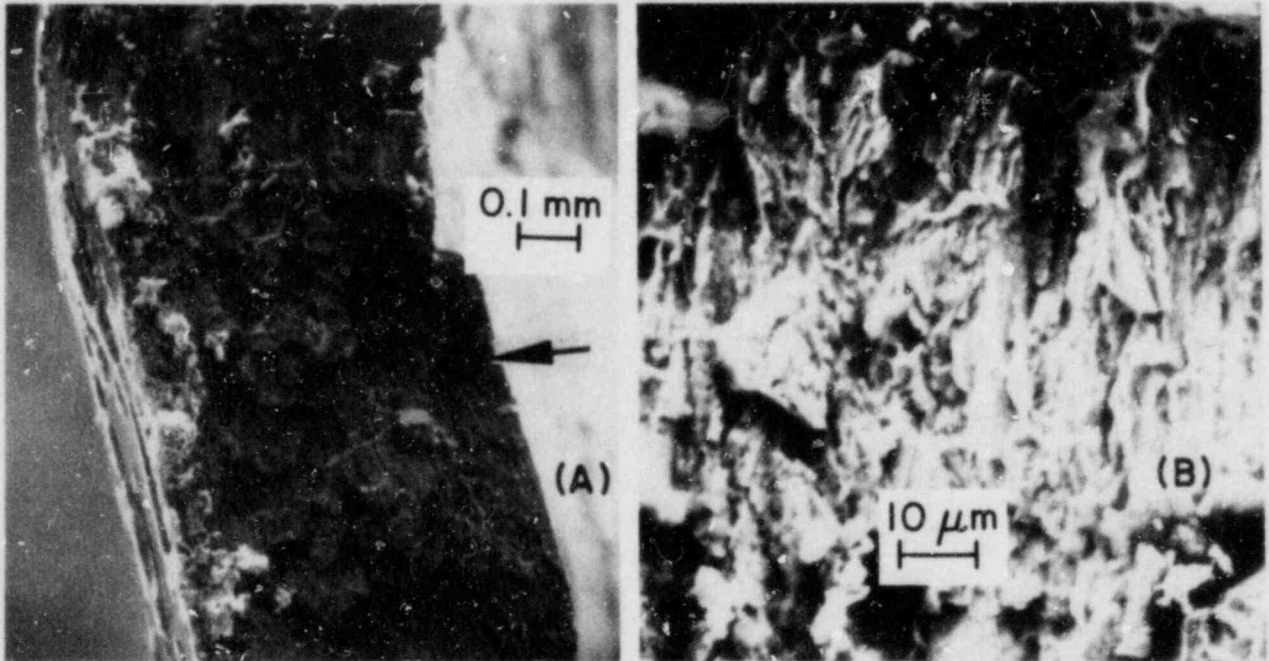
SEM Fracture Surface Morphology of the Specimen of Fig. 3.6, at the Location of the Expanding Ring. (A) View encompassing outer and inner surfaces (the inner-surface compression mark is visible just to the left of the scale marker); (B) higher magnification of the circled, arrowed area of (A), showing pseudocleavage.
